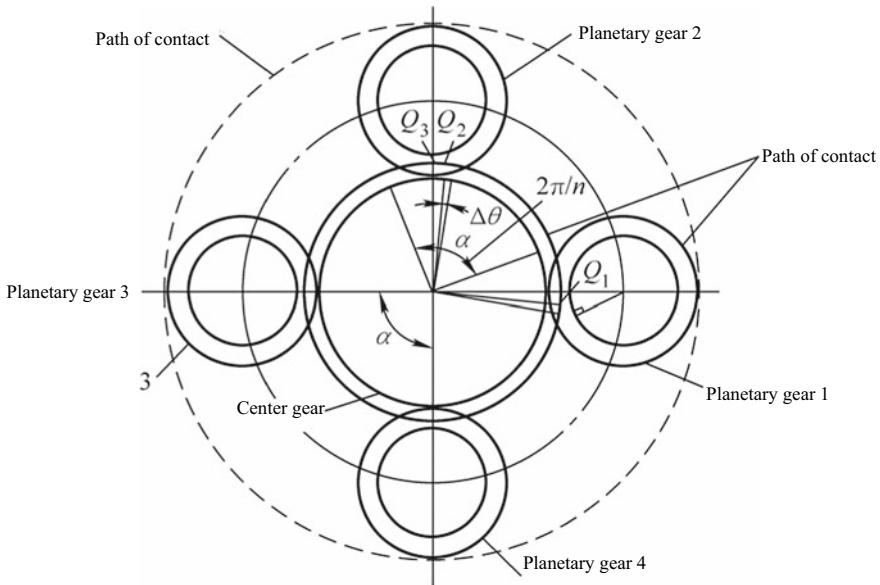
Meshing phase difference between center gear and planetary gear
